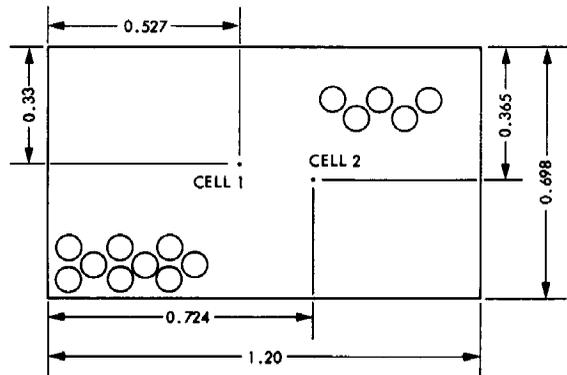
Thermocouple location - ASEC module (view: sun side; dimensions in meters)
